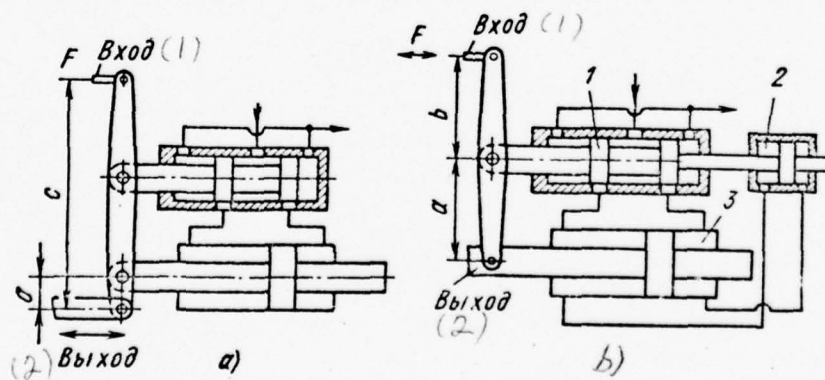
Hydraulic boosters with the mechanical (a) and hydraulic (b) loading of control knob.
